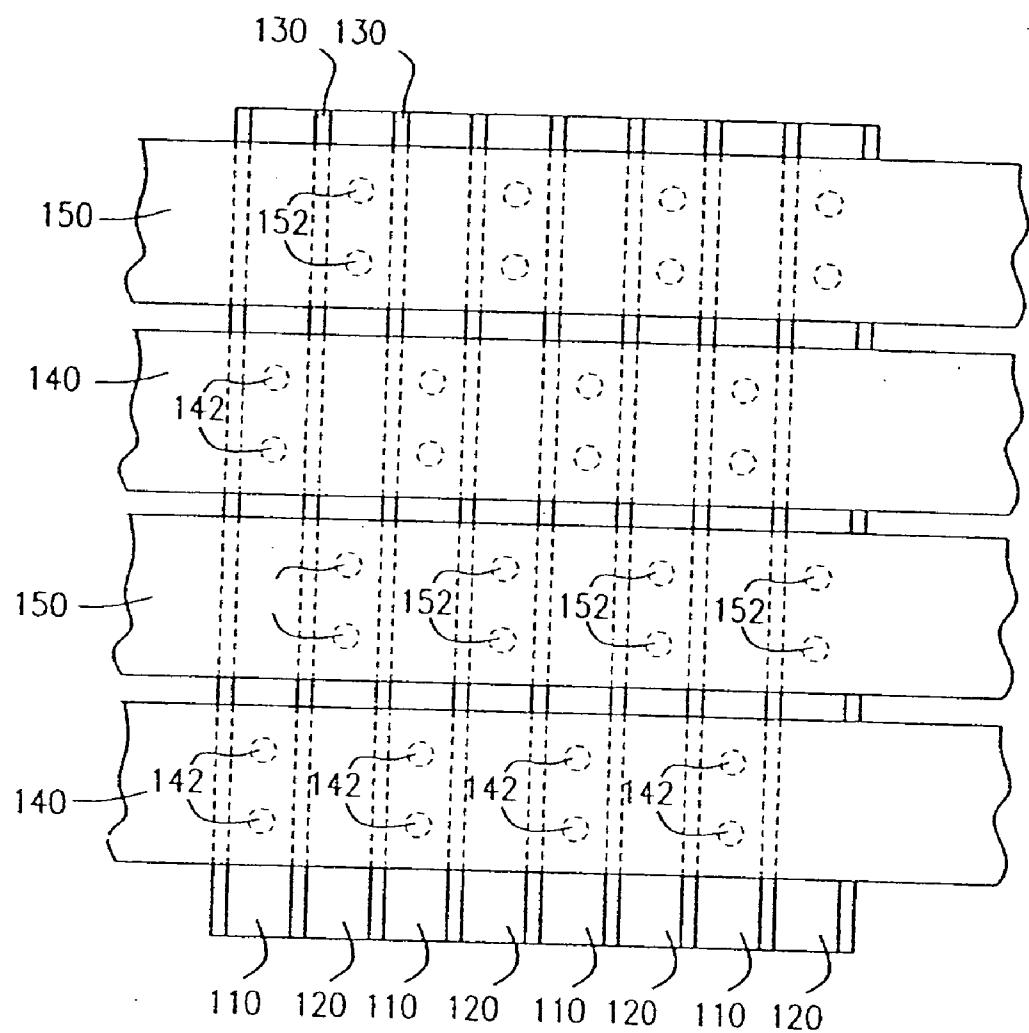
Illustration of Die with Solderable Electrical Contacts Mounted on Printed Circuit Board
